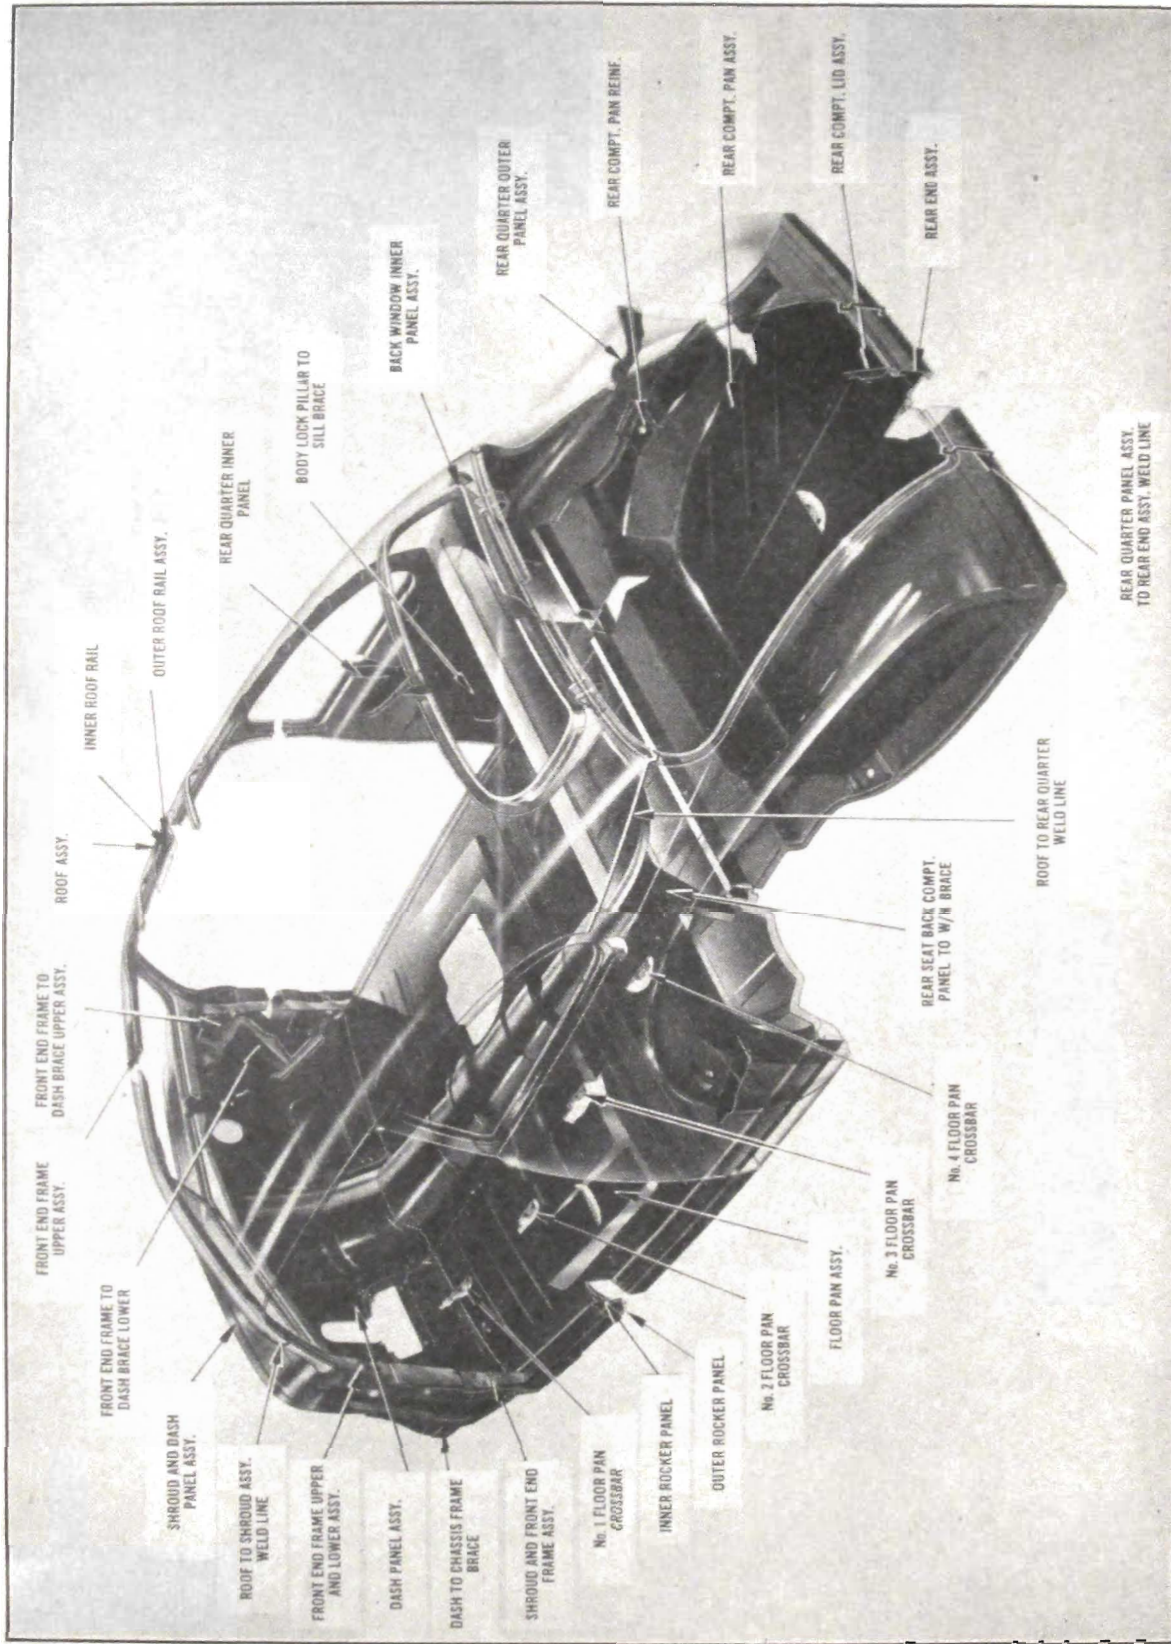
Phantom View—Series 50-70 Coupe—Showing Part Names and Major Panel Welding Lines
